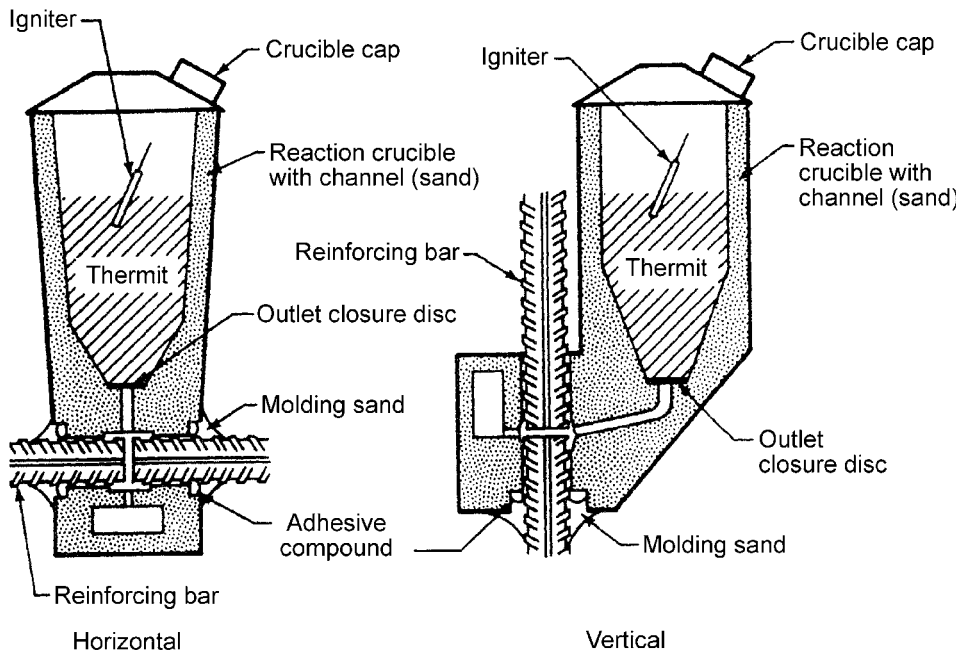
Schematic illustrations showing the typical arrangements of the thermit process for welding concrete steel reinforcing bars, horizontally or vertically. Source: Ref 3
